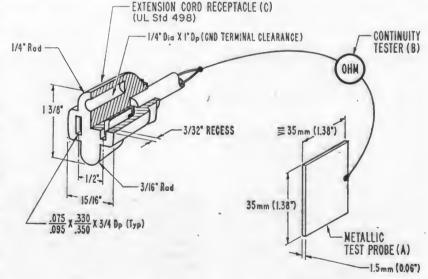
PLUG BLADE SHIELDING GAGE (Excluding Mower's Integral Plug Connector)
